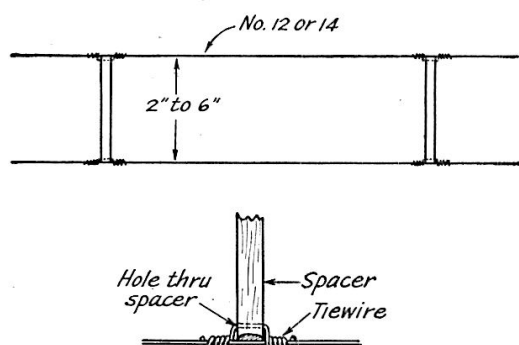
Typical construction of open-wire line. The line conductor fits in a groove in the end of the spacer, and is held in place by a tie-wire anchored in a hole near the groove.
